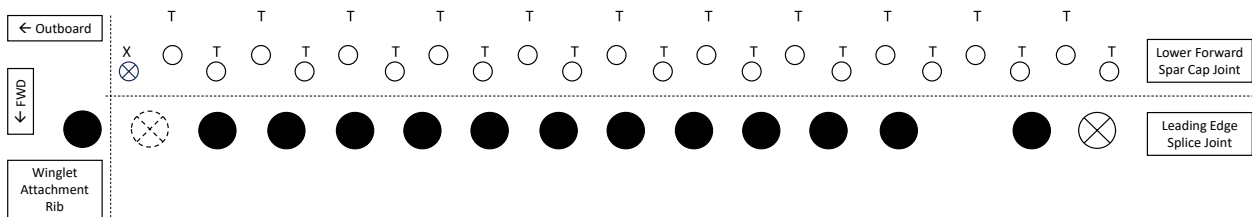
Schematic of the lower leading edge splice joint and lower skin-to-forward spar fastener conditions along the wing extension. Fractured fasteners are identified by an open circle, missing fasteners by a circle with an "X" and intact fasteners by a filled circle. Fracture designations are T = tensile fracture mode, S = shear fracture mode, B = mixed mode bending fracture used in conjunction with T or S as applicable. The fastener represented by a dashed "X" circle was drilled out to aid with disassembly.
